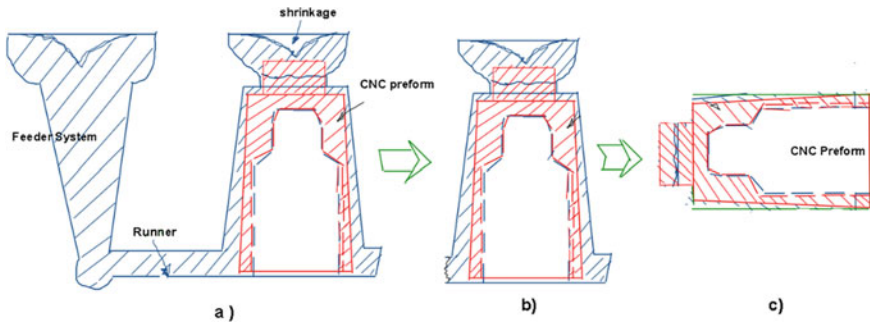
Manual machining of casting process. a casting result, b deburring feeder system. c turning of CNC preform
